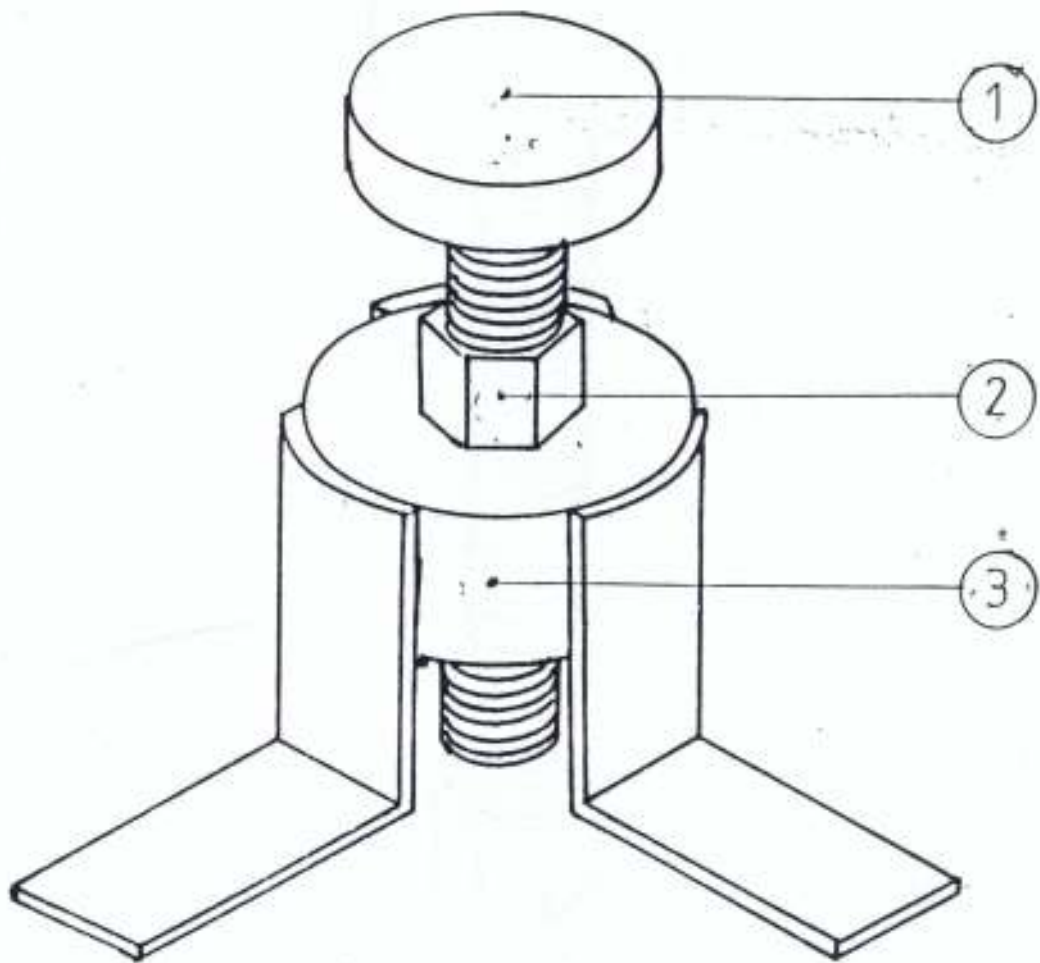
ASSEMBLY OF ELECTRICAL AND MECHANICAL DEVICES
